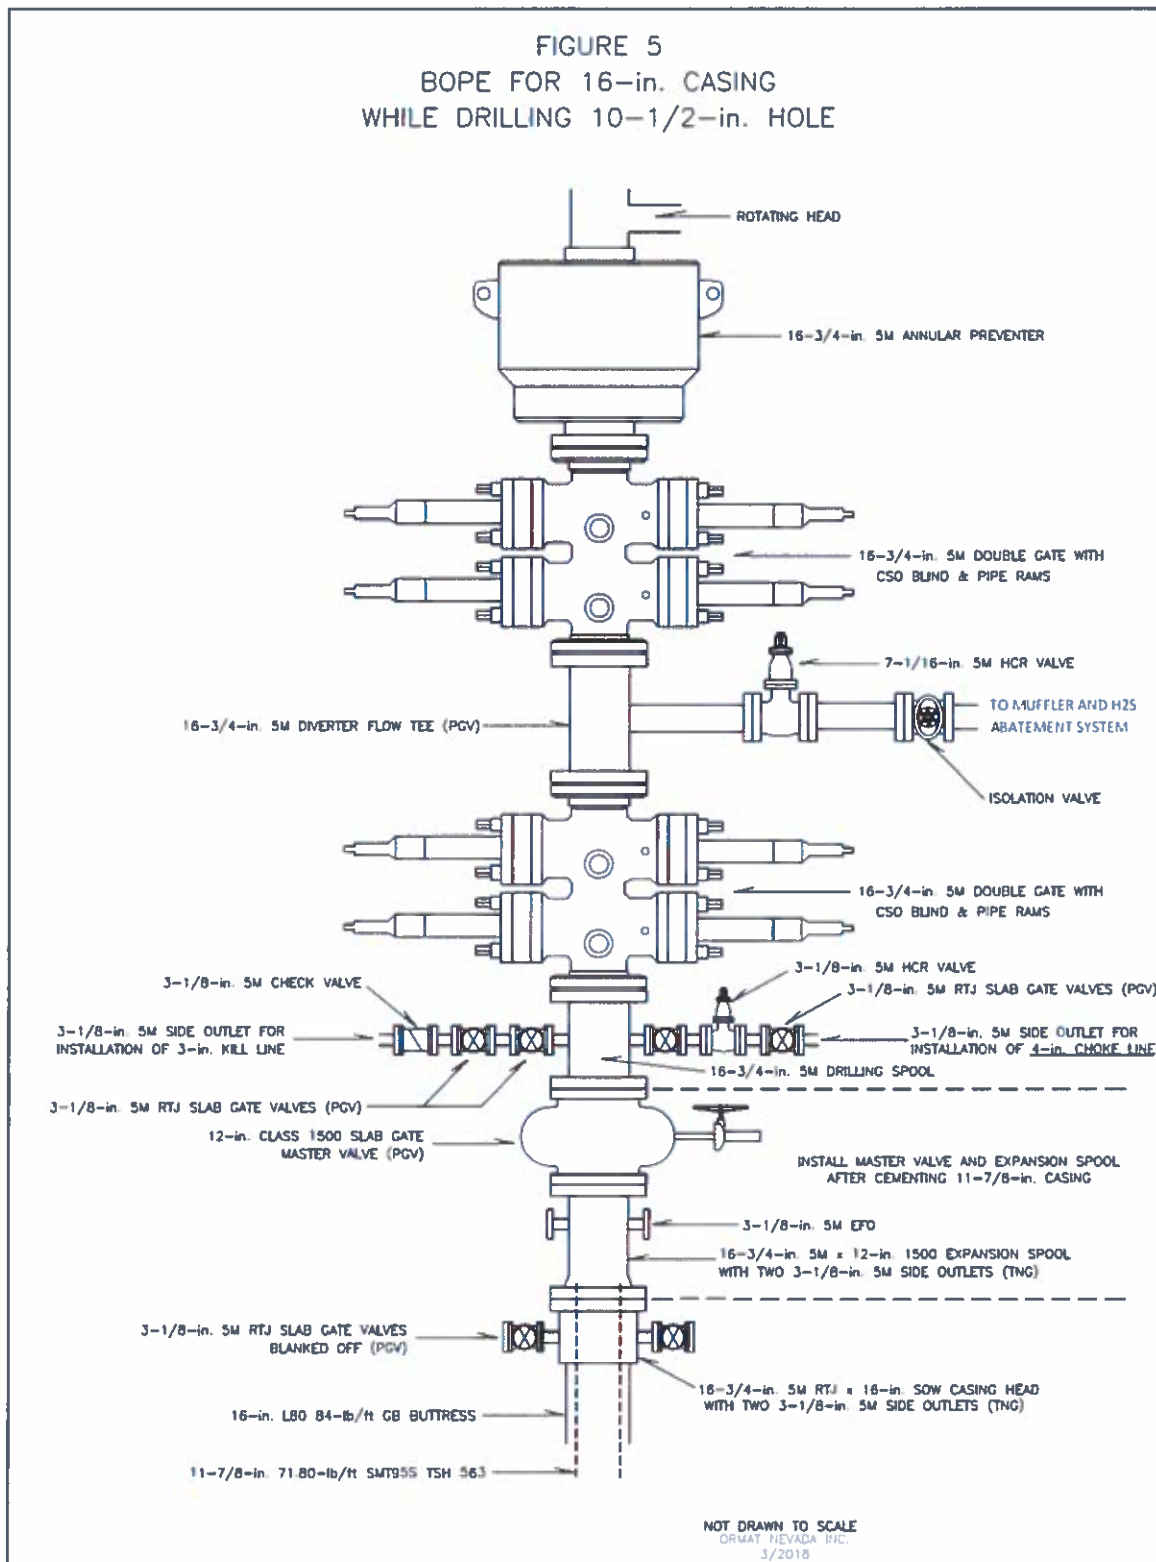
BOPE for 16-inch casing while drilling 10-1/2-inch hole.
